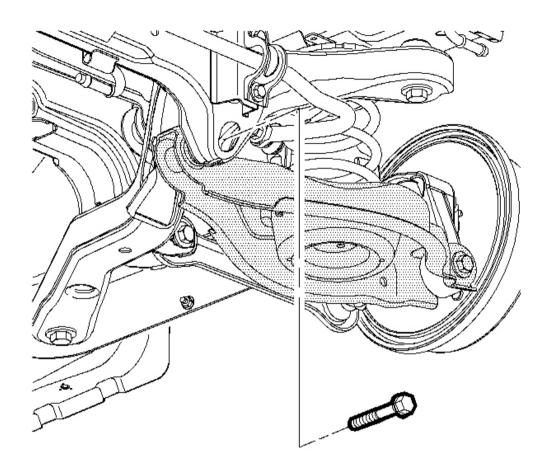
Lower Control Arm & Frame Bolt Courtesy of GENERAL MOTORS CORP.
